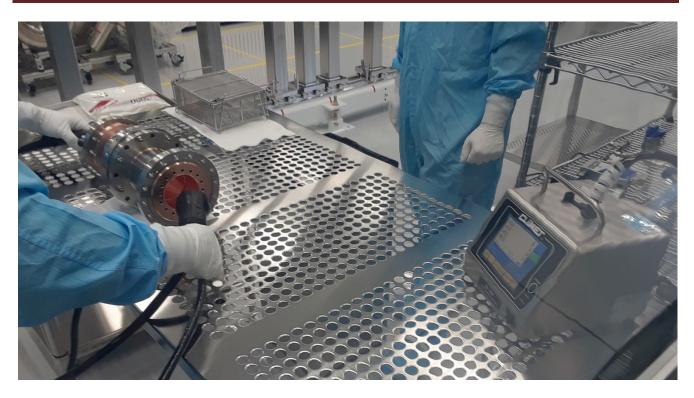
Clearing parts by flow of Nitrogen before assembling and assembling.
